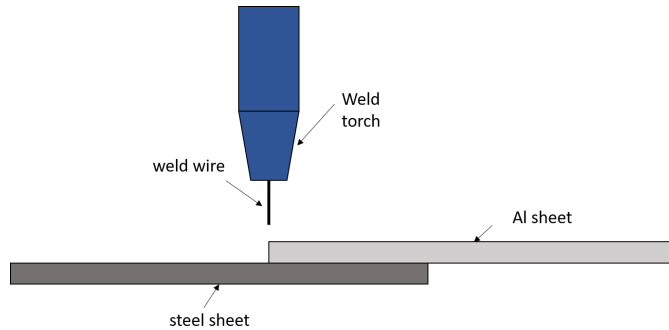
Schematic illustration of the Cold Metal Transfer (CMT) welding assembly for a dissimilar Al-Fe lap joint. Copied from [40].
